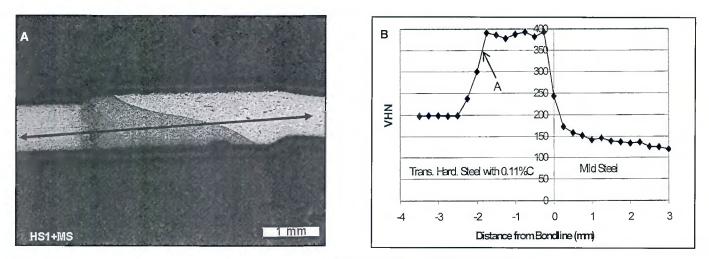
Macrostructure and hardness profile of a resistance mash seam weld between 0.8-mm DP980 and AKDQ steel.
